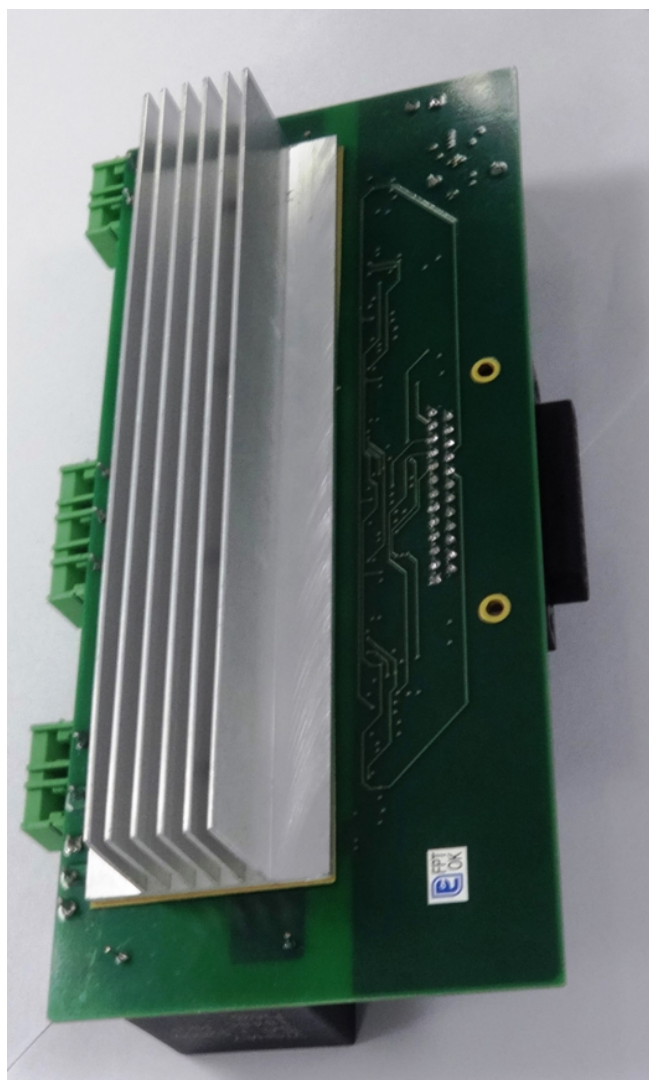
Heat Sink Mounted on Bottom Side of TIDA-00915 PCB
